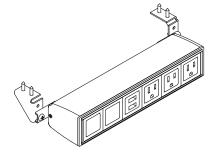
Under Mounted Electrical Component for Tables (3U shown)
